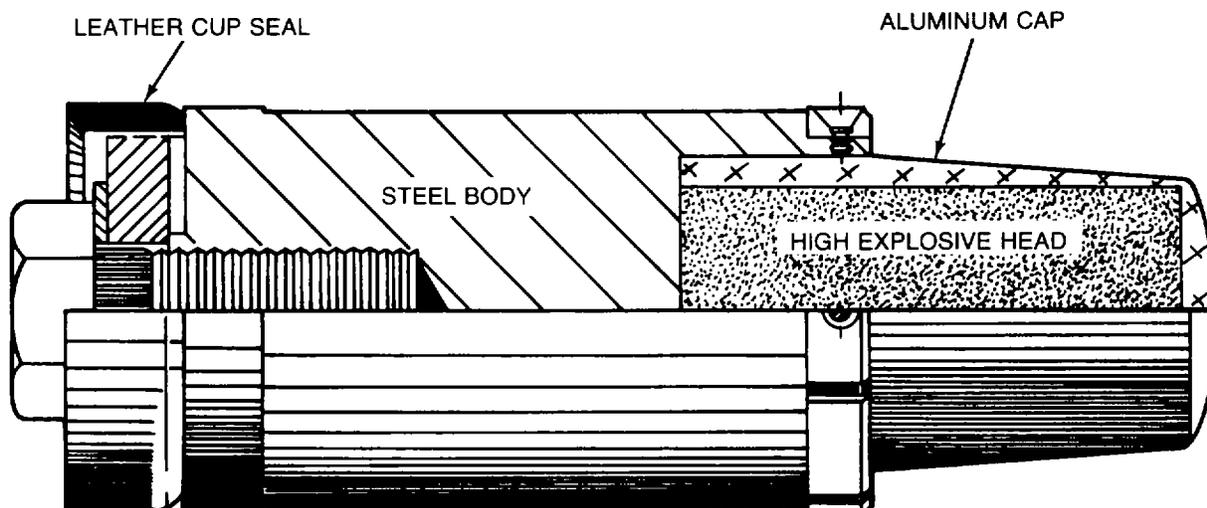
Scaled drawing of the SUSAN projectile. The high explosive head is 4 in. long and 2 in. in diameter (102 m x0.051 m).
